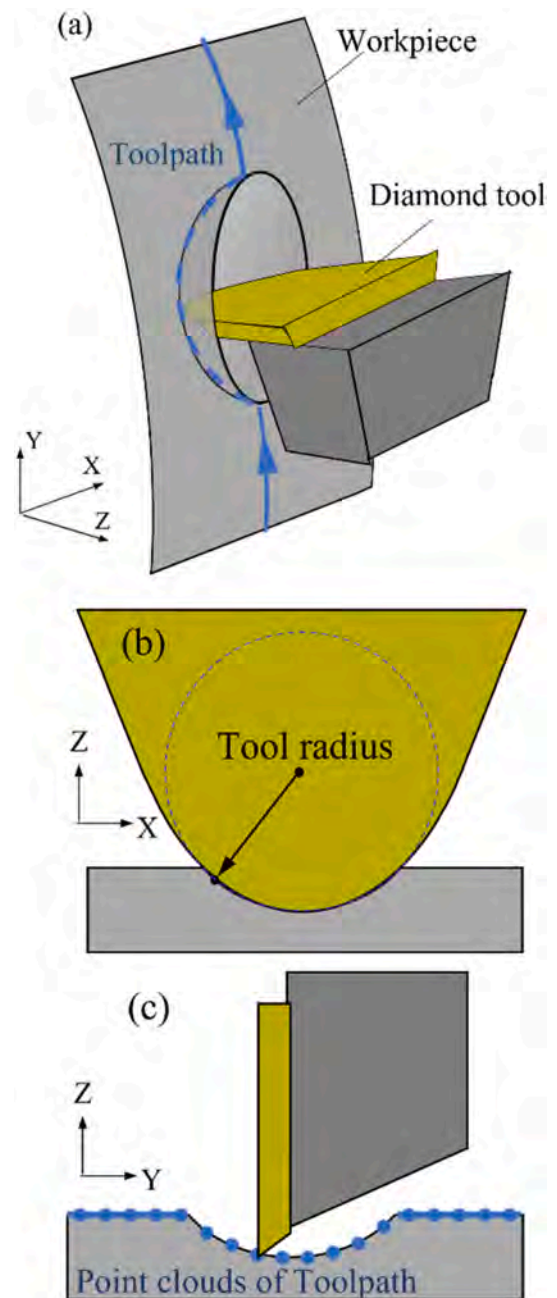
(a) Overview, (b) front view, and (c) side view of spherical dimple machining by scooping cutting.
